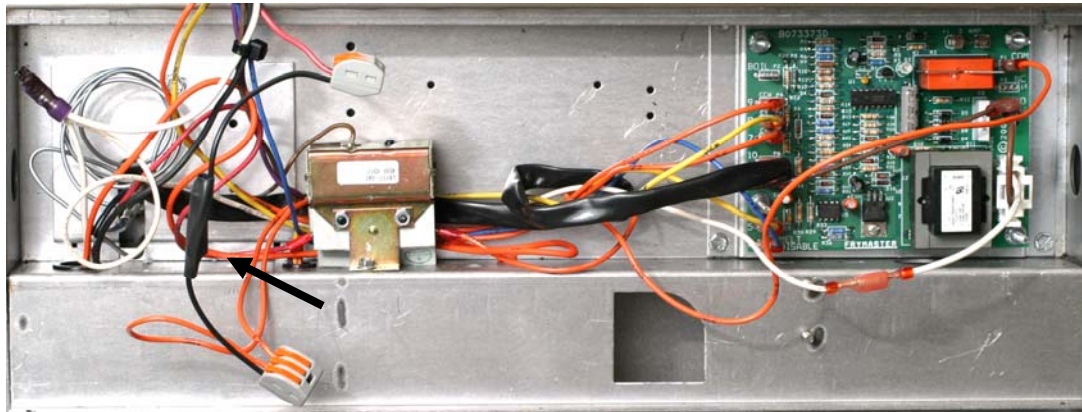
The new board and the new resistor (see arrow) are shown installed on a fryer with the boilout option. The board can be located in other positions on older fryers.
